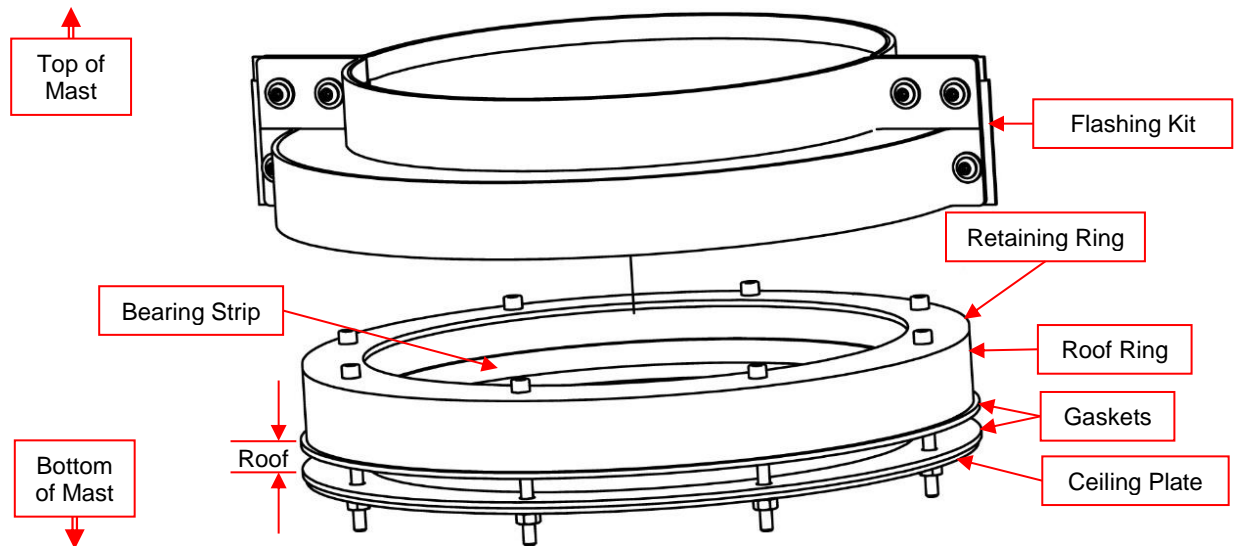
Internal Mounting Kit for Rotating Super-Heavy-Duty Masts (P/N: 4915901 Shown)
